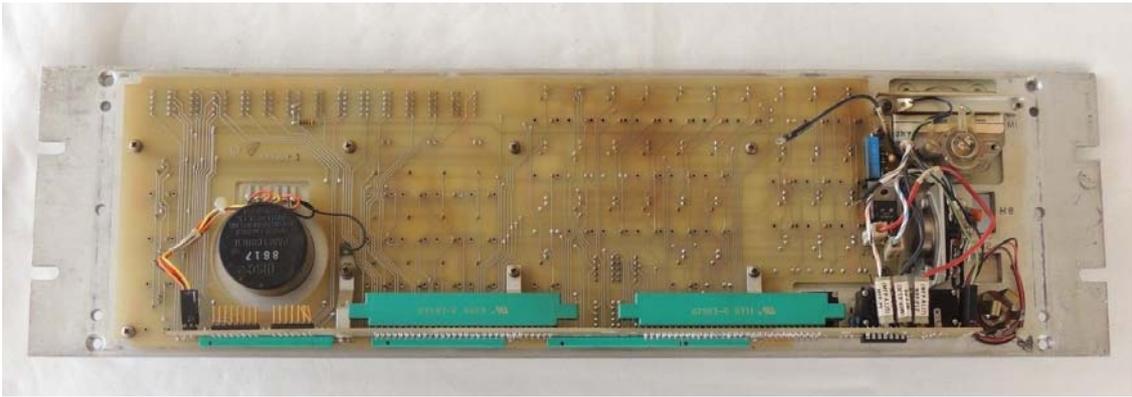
The whole MFP Front Panel Assembly (Rear view, see text).
